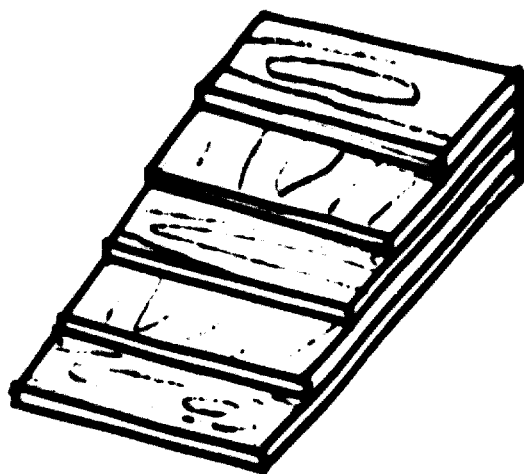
Longitudinal and transverse jointing of veneer sheets
